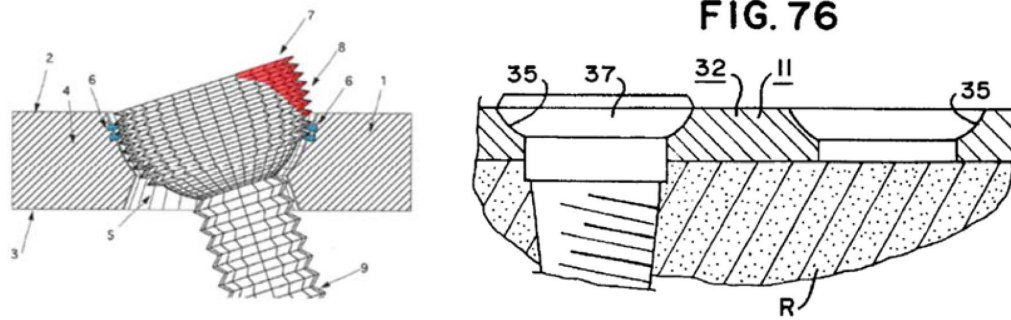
is an annotated front view of Fernandez’s bone fixation assembly where the screw is locked at a tilt (i.e., non-perpendicular relative to the plate). Figure 76 is a front view of Grusin’s bone fixation assembly where the screw is perpendicularly locked relative to the plate. Patent Owner argues this side-by-side comparison of installed screws “demonstrates that the exposed threads of Fernandez,” which are annotated in red, “are unsuitable for Grusin’s purpose.” *Id.* Patent Owner asserts this comparison supports Dr. Neufeld’s testimony that Fernandez’s “edges . . . would not only irritate the tendons . . . but would undoubtedly cause great trauma to the tendons or other soft tissue if used in the transverse plate of Grusin.” *Id.* at 31–32 (quoting Ex. 2017 ¶ 66).
